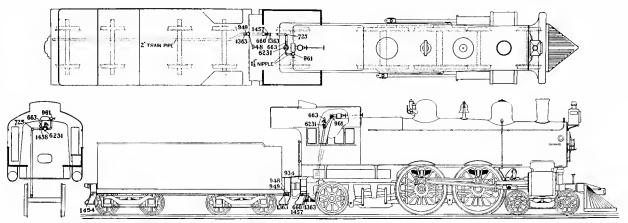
Steam Heat Equipment for Locomotive and Tender.
